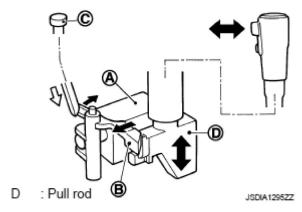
Identifying Shift Lock Solenoid, Lock Lever, Pull Rod, And Shift Lock Release Button Courtesy of NISSAN MOTOR CO., U.S.A.
